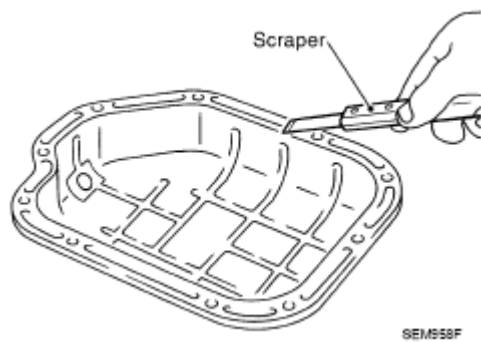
Removing Liquid Gasket From Mating Surfaces Using Scraper
